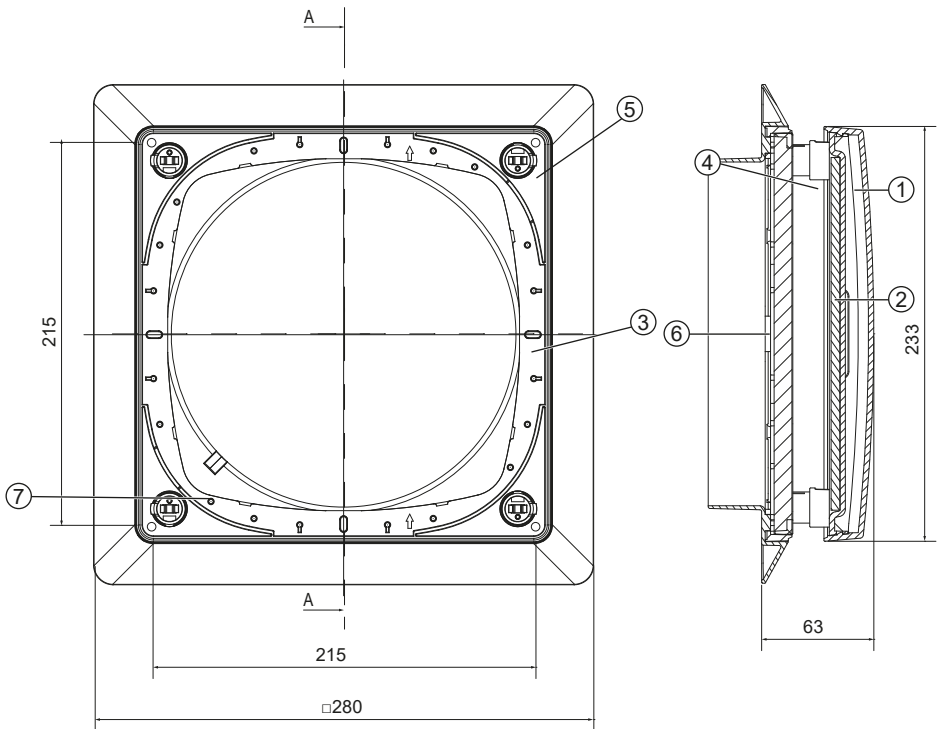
Dimensional drawing of the Flair - XL V-280x280 inner cover white SDE
